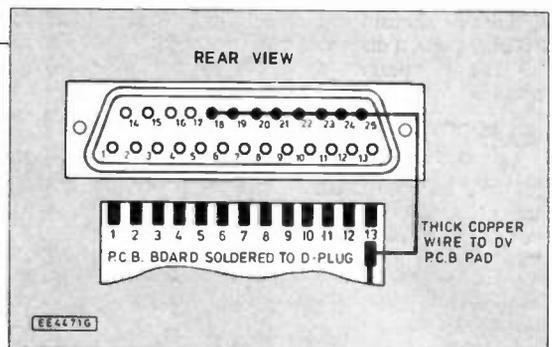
Soldering the D-plug directly onto the p.c.b. copper pads using the lower pins 1 to 13, and the top pins (18-25) for the 0V line.
